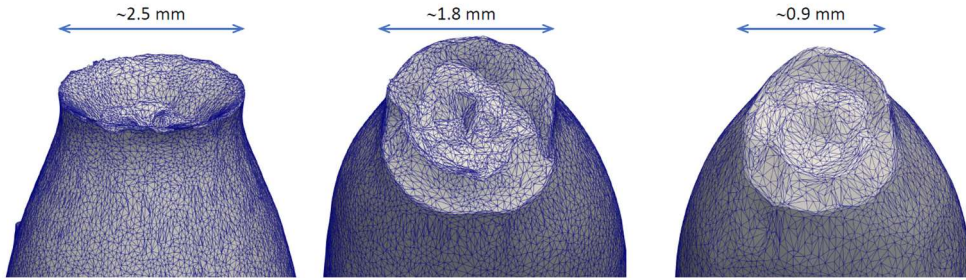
Classic cup cone failure presented in uniaxial tensile specimens.
